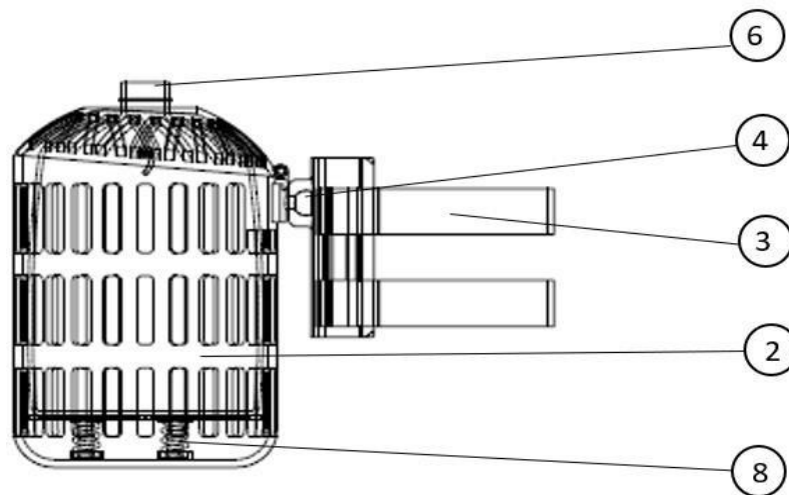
Frontal detail of the wearable modular chest tube carrying apparatus for lower extremities
